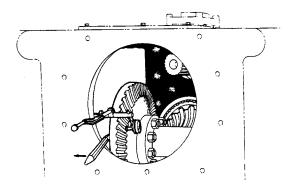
Checking for Bevel Gear End-Play (T-70854)
